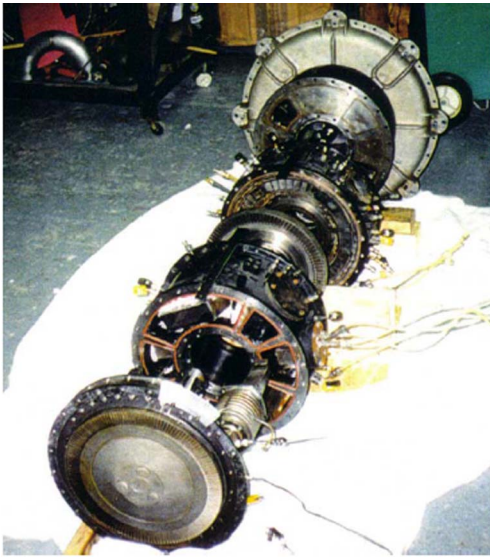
Disassembled view of the GPC rotor, taken from Ref. [137]
